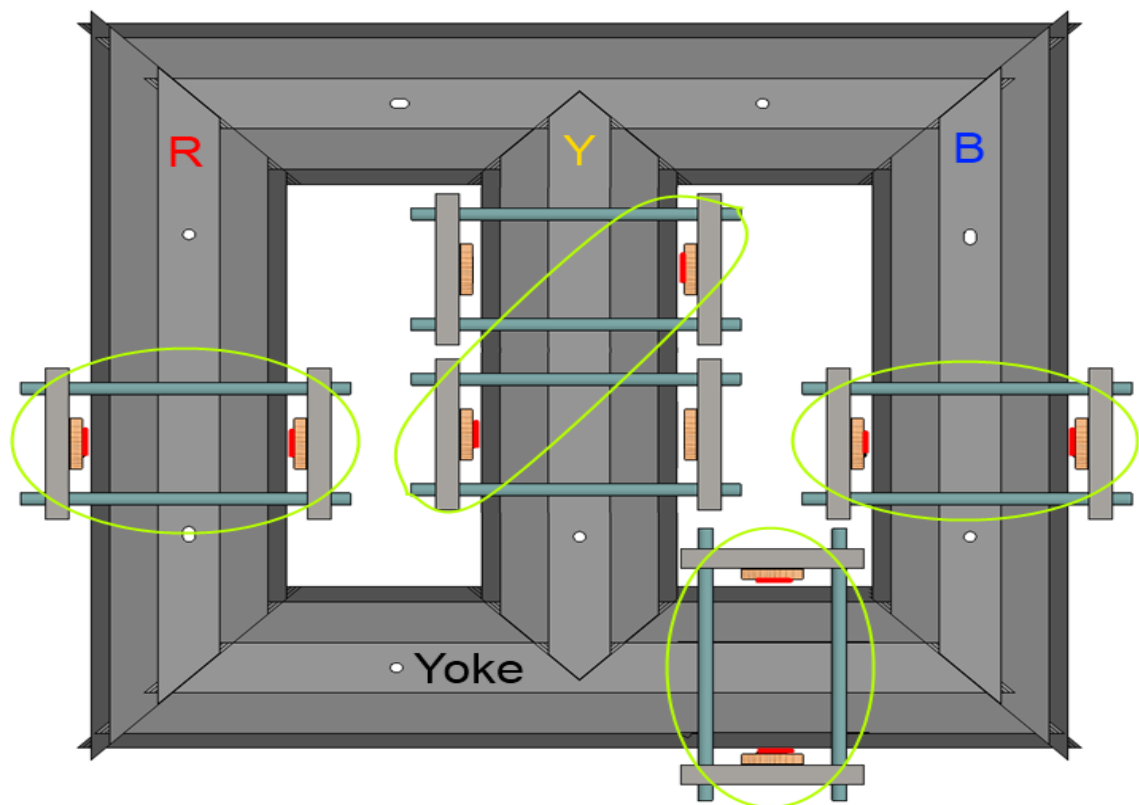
Sketch of example artificial burr clamping placement configurations: opposite burr placement on limbs R,B, opposite burr placement on the yoke and shifted burr placement on limb Y
